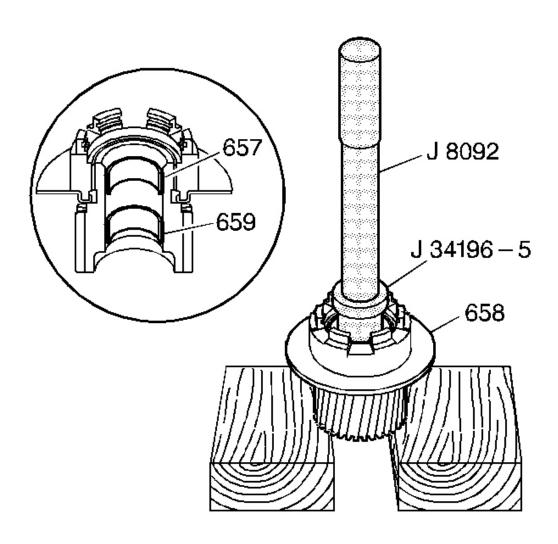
View Of Input Sun Gear Front Bushing & Special Tools Courtesy of GENERAL MOTORS CORP.
